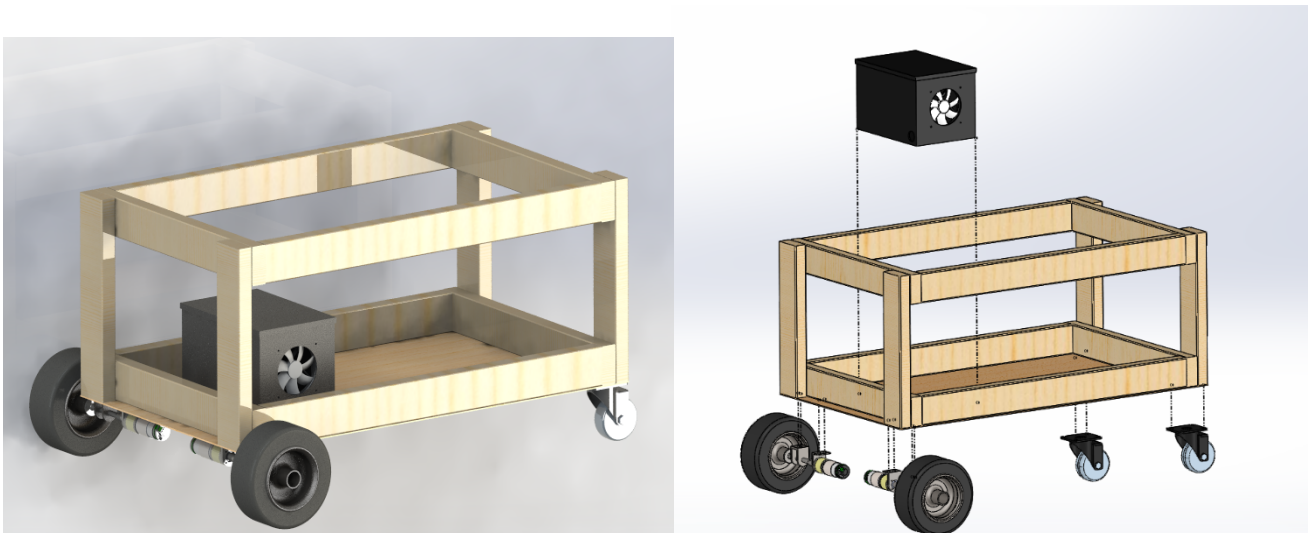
Completed Prototype Frame (left) and exploded view (right)
